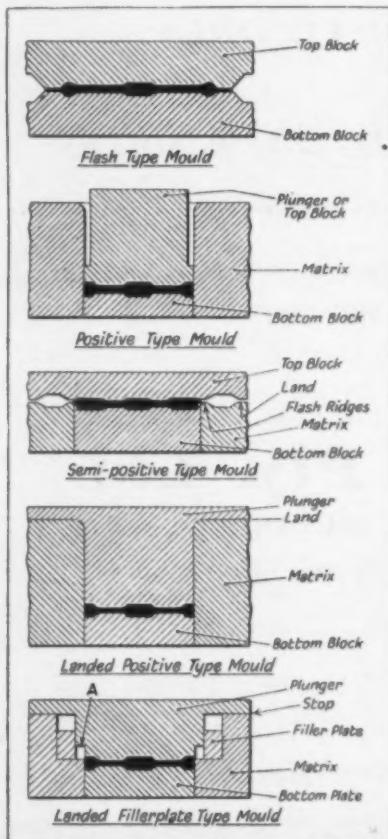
The basic types of compression moulds are positive moulds, landed positive moulds, semi-positive moulds, and flash moulds. The landed filler-plate flash mould is a variation of the semi-positive mould, and is widely used.
